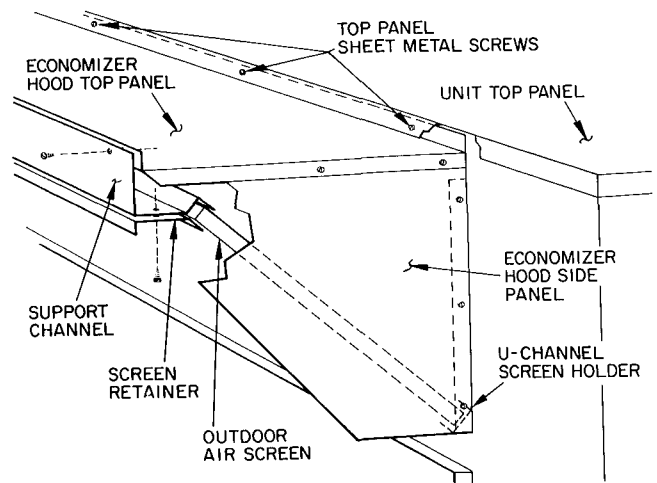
Economizer Outdoor Air Inlet Hood Assembly
